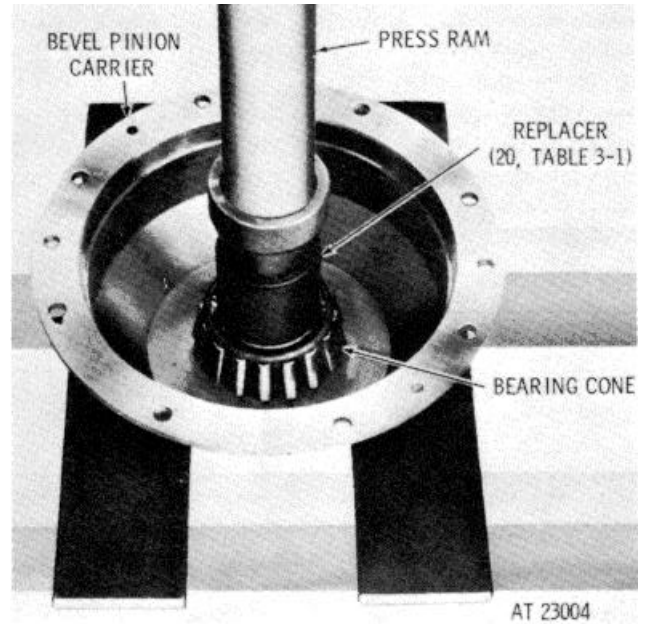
Installing bearing inner race onto hub of bevel pinion carrier
